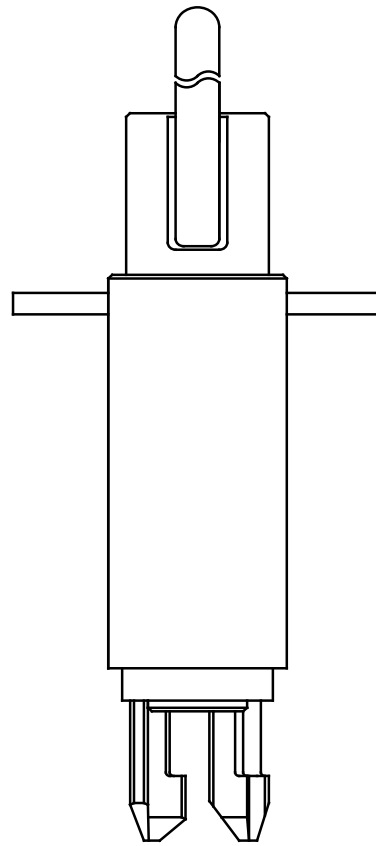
Fuel Transfer Tube Assembly
